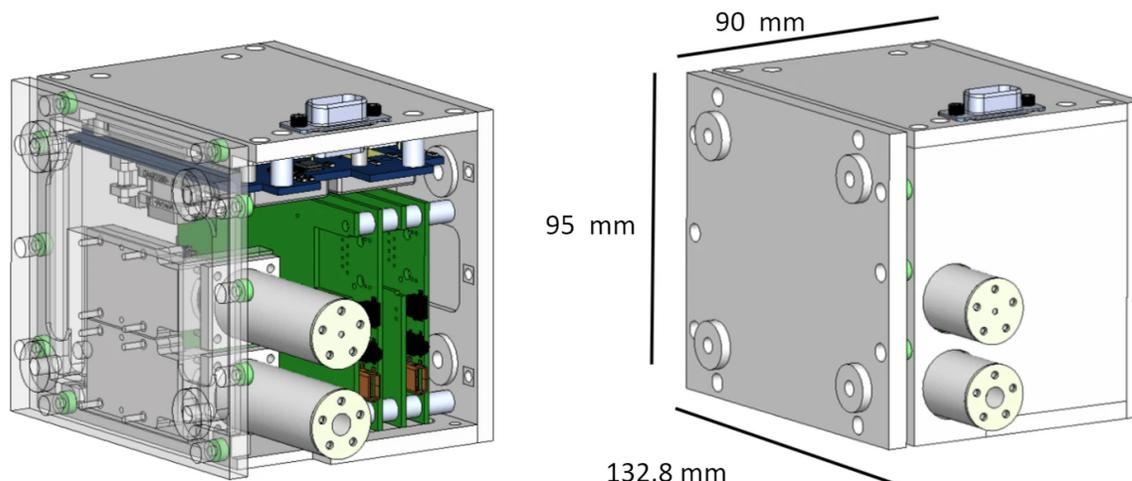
Above is a rendering of the STEAM instrument. Some exterior walls are not shown
